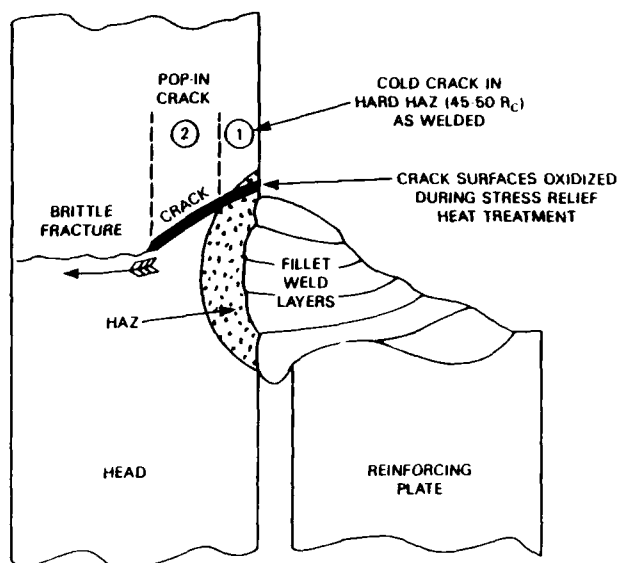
Description of 0.3 in. (7.6mm) Deep Weld Toe Crack Which Initiated the Head Fracture. Cross Section View.
